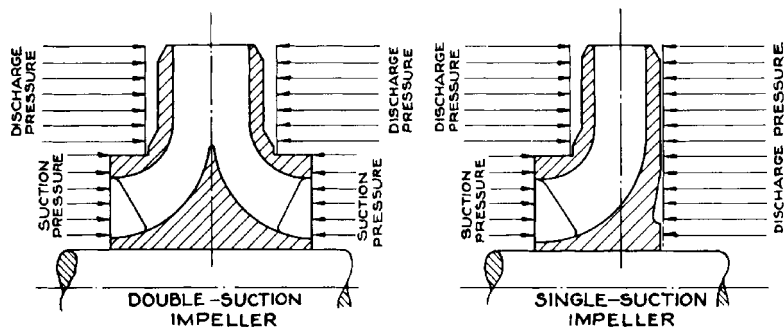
The origin of pressures acting on impeller shrouds to produce an axial thrust
